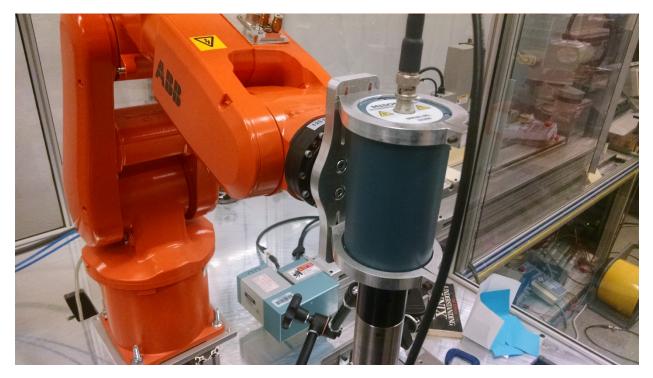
Robotic Ultrasonic Welding System (with thermal camera and force sensor).
